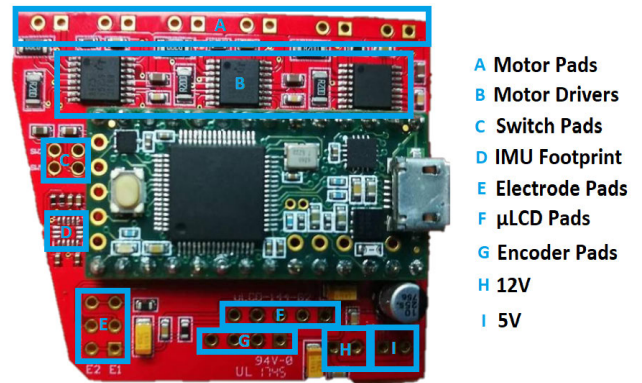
Control board PCB based on ARM Cortex-M4.
